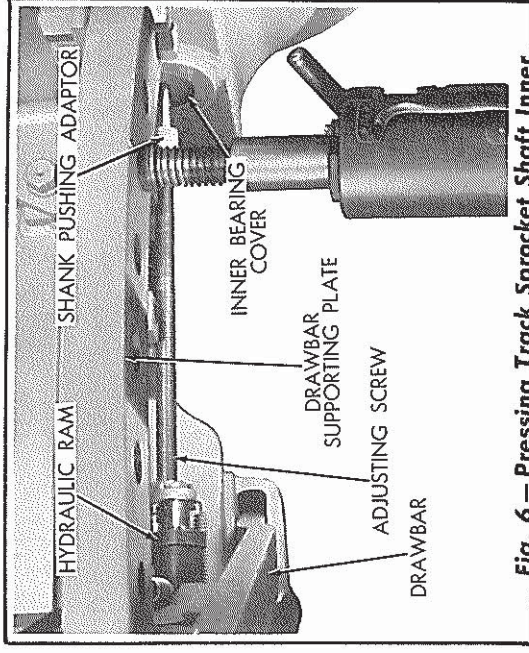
Pressing Track Sprocket Shaft Inner Bearing Cage from Housing
